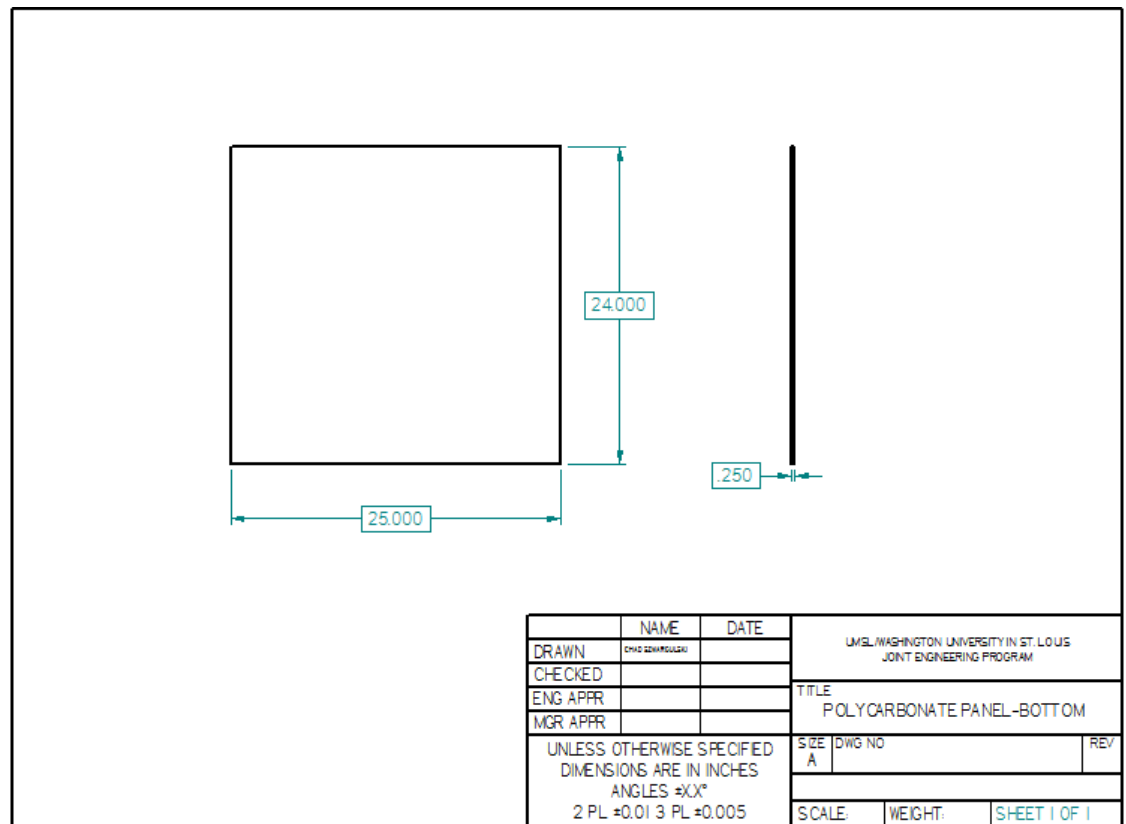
Drawing -Polycarbonate Panel-Bottom.
